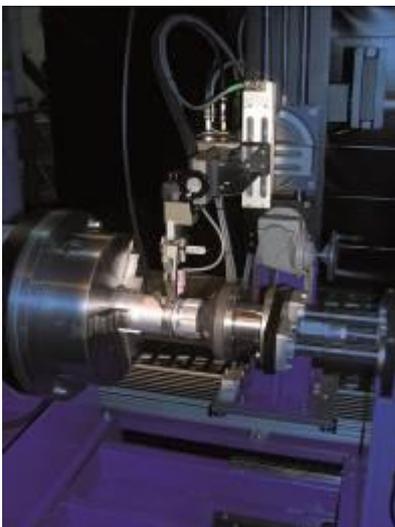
Prefabrication of an aluminium manifold using AC welding current with Arc Voltage Control (AVC)
